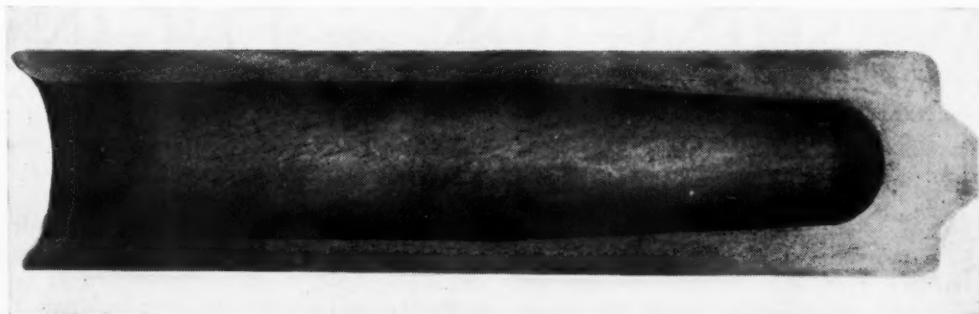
CROSS SECTION OF 75-MM SHELL FORGING AFTER PASSING THROUGH FINISHING MILL
